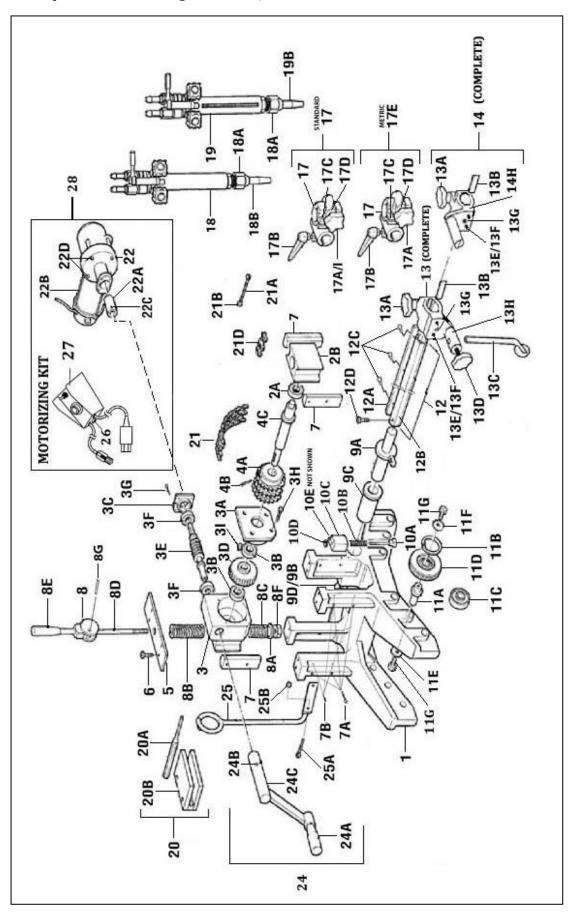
Exploded Parts Drawing of the Maxi Jolli Chain Machine
